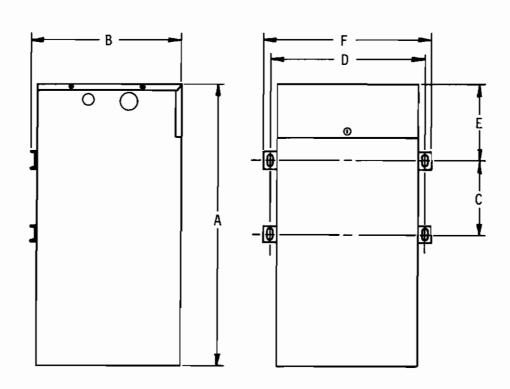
POWER CONDITIONER DIMENSIONAL DRAWINGS
